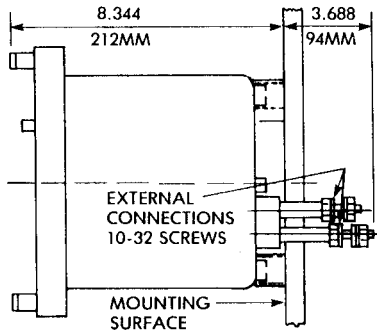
Types C1 case relays recommended for surface mounting (side view) for panels larger than 0.188 in. (5mm) thick
